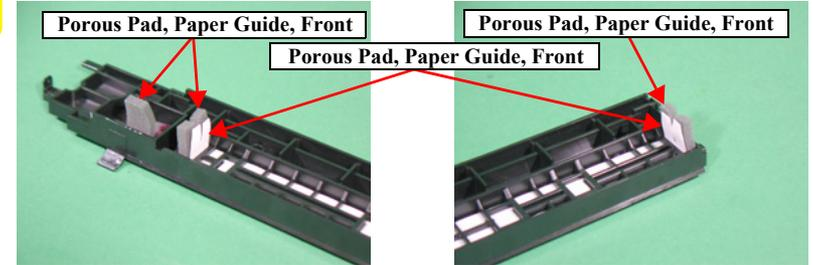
Porous Pad, Paper Guide, Front and Porous Pad, Paper Guide, Front, Support
